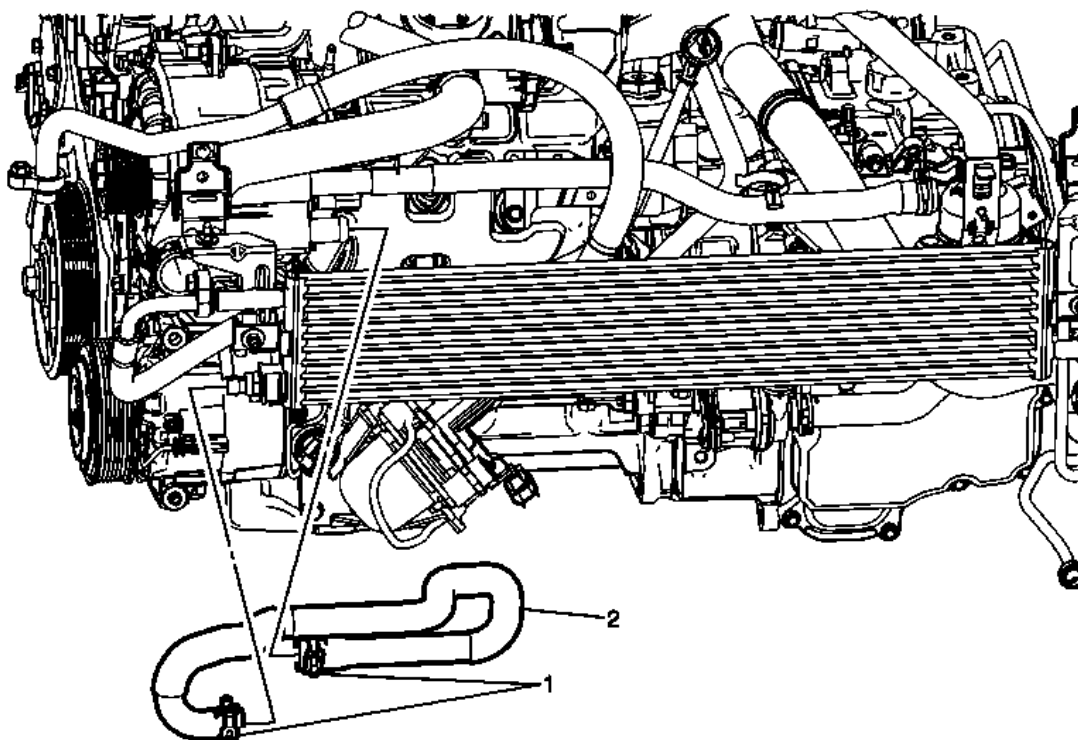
Auxiliary Radiator Outlet Hose & Clamp
